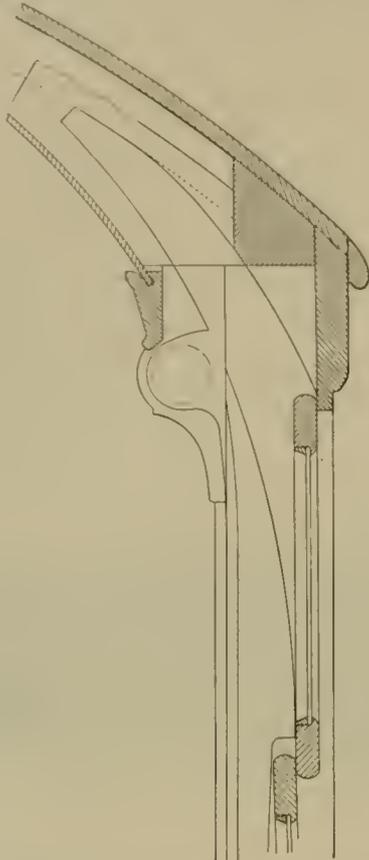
METHOD OF STOWING SASH IN ROOF POCKET.
